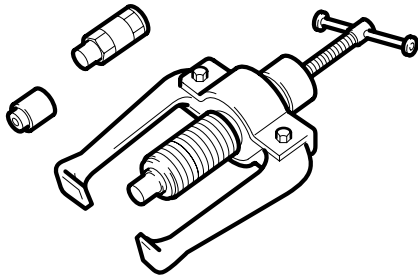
Removing 300/400 rear spring front eye bush (70 mm)
